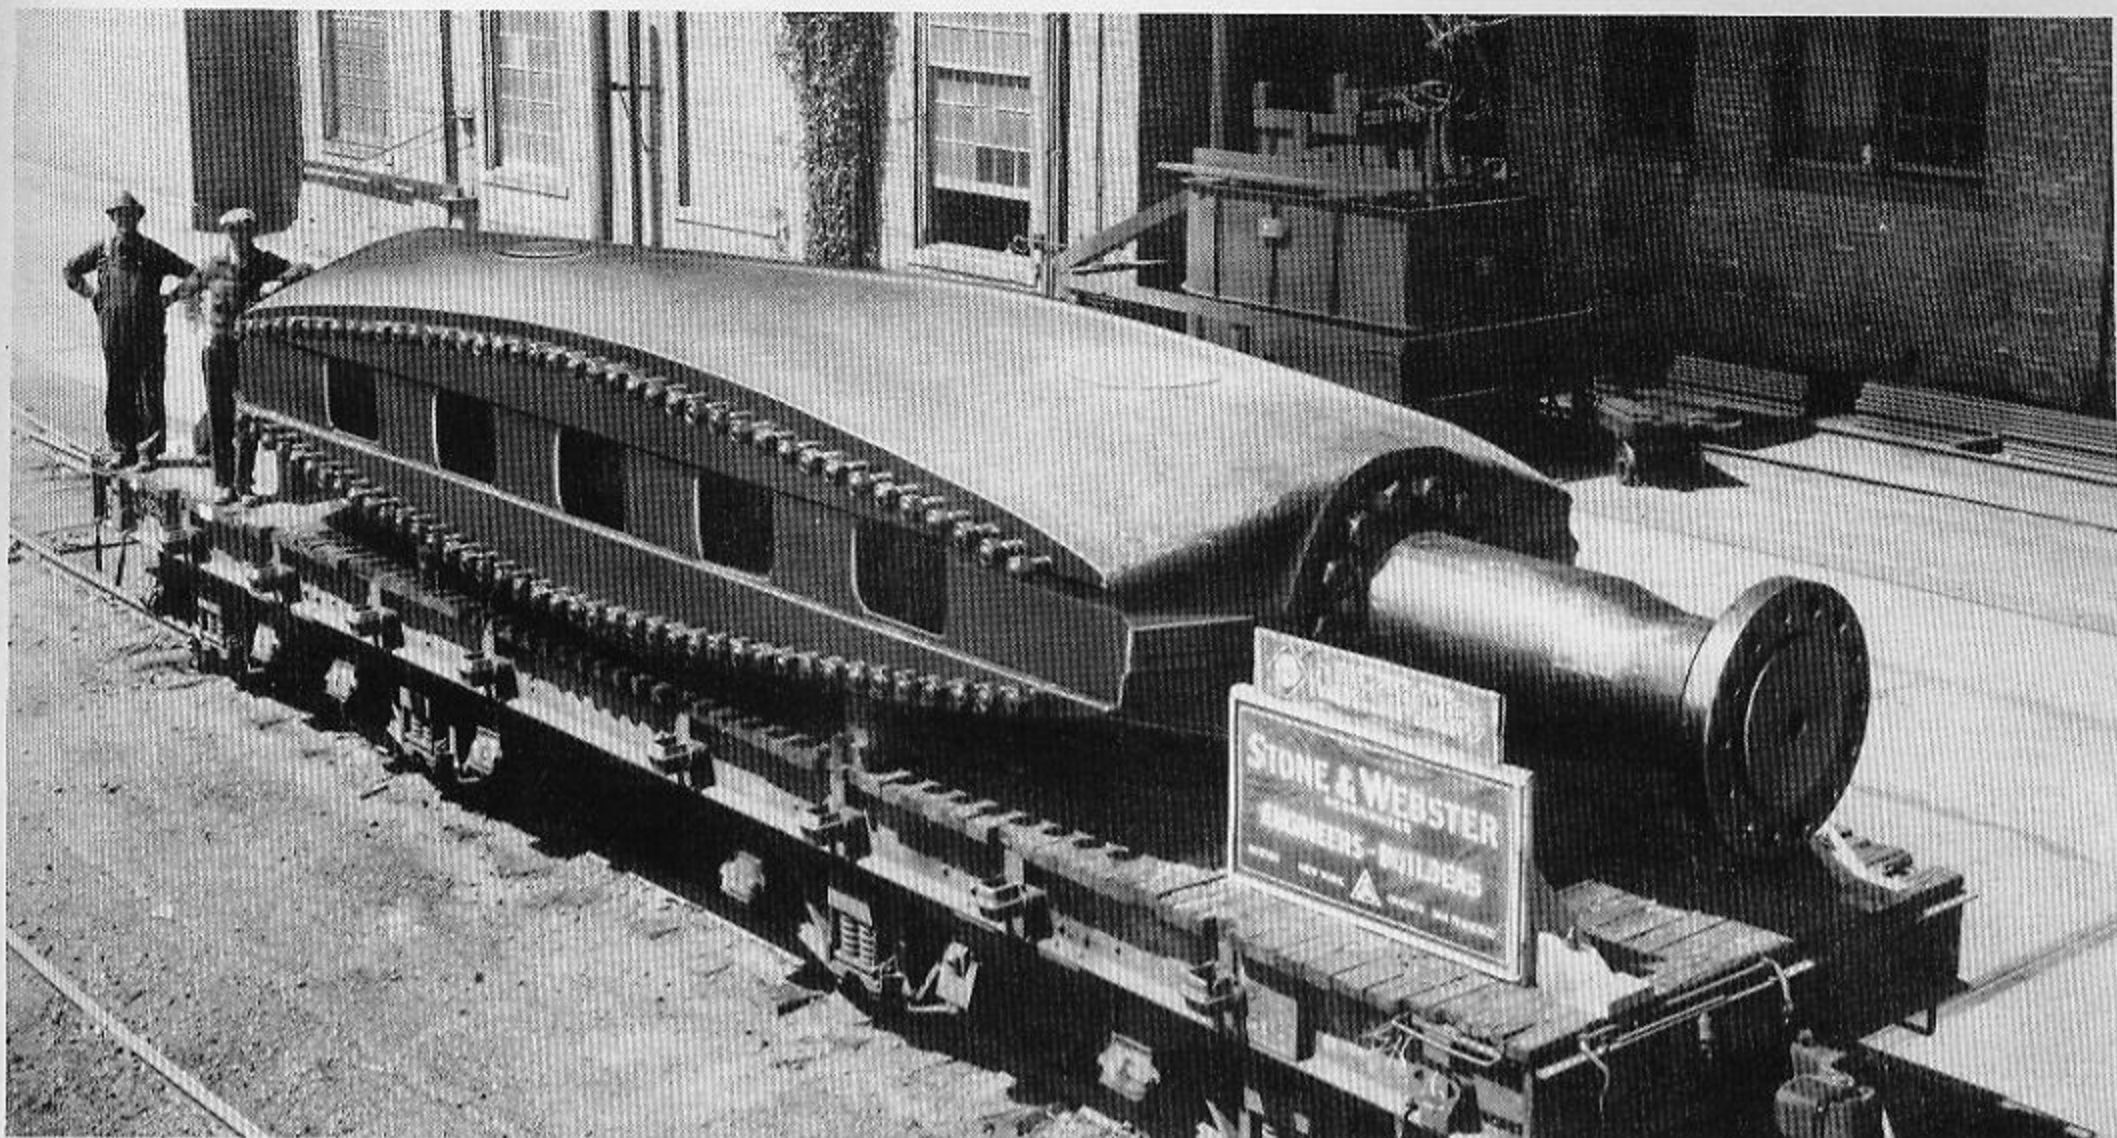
Center section of the cast steel wicket for a 27 ft butterfly type valve. This section alone weighs 151,000 lb.
